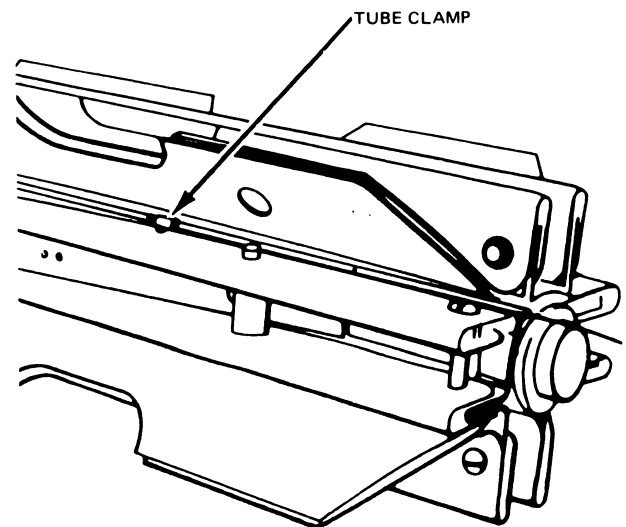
Fin release wire guide tube and clamp installed (Mod 1 fin).
